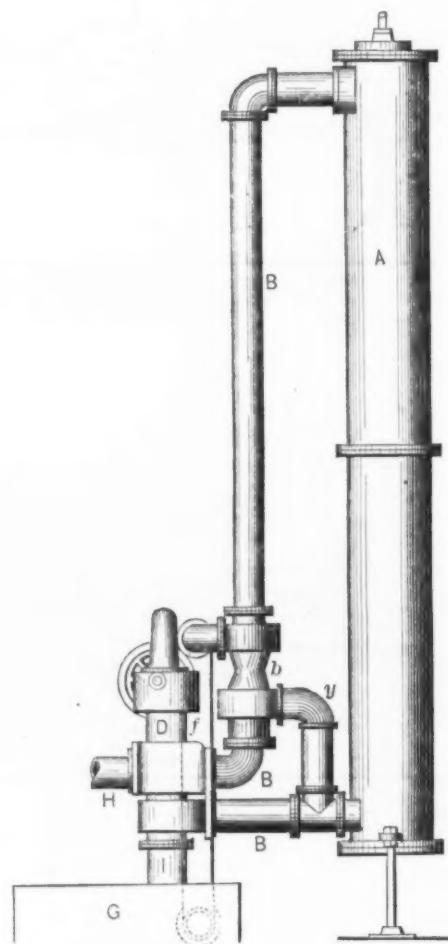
Elevation Showing Arrangement Slightly Modified.
